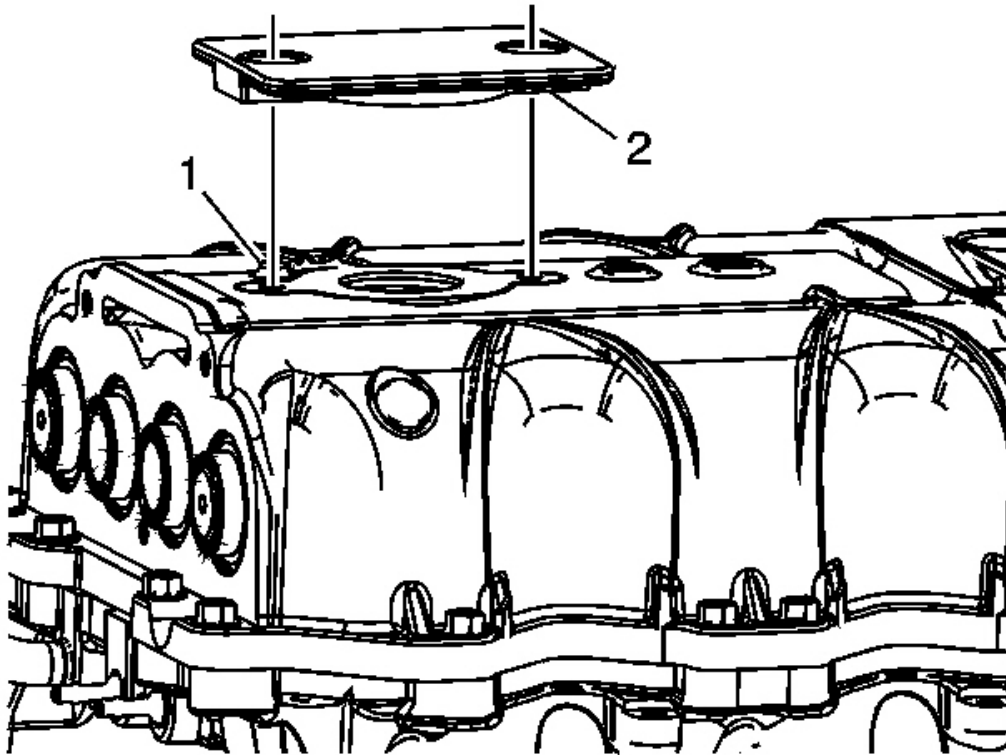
View Of Charge Air Cooler Cooling Fill Cap O-Ring
